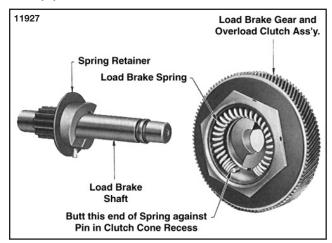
Load Brake Gear and Overload Clutch Assembly Removed from Load Brake Shaft Showing Brake Spring Installed in Clutch Cone
